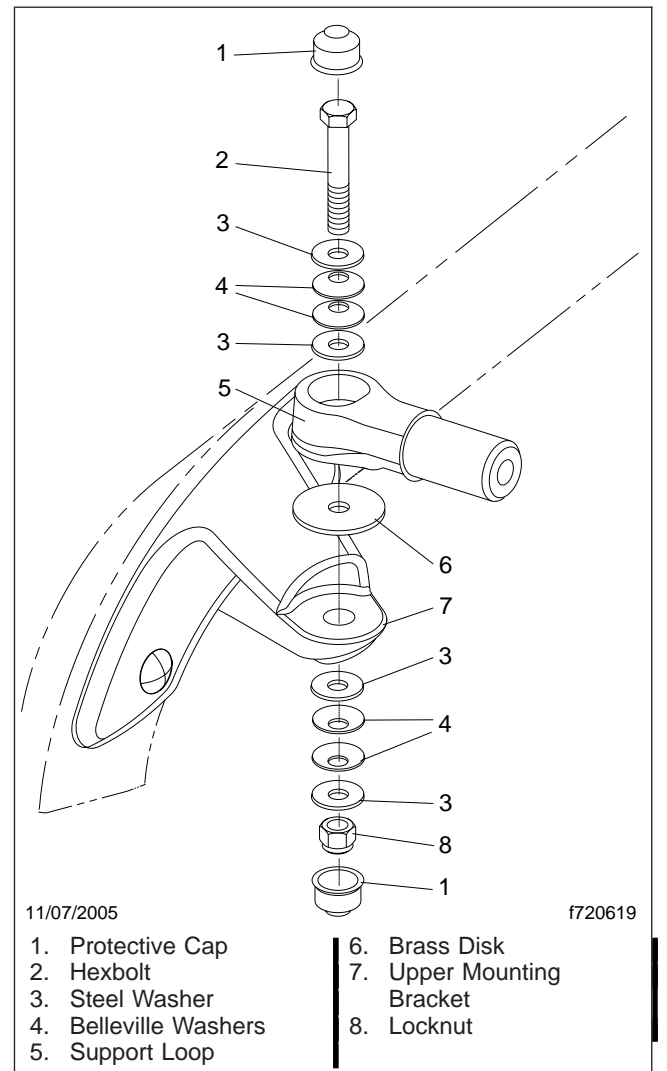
, Upper Pivot-Point Fasteners (Lang-Mekra)
